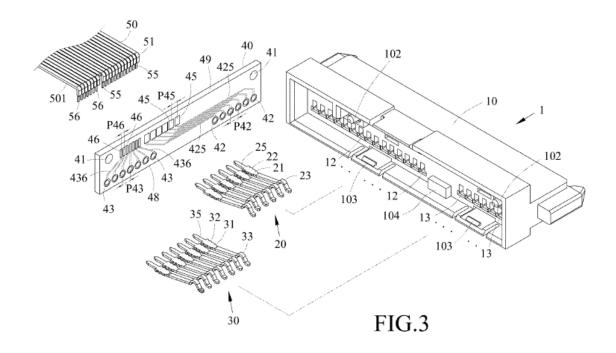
depicts an exploded diagram of the connector components. The connector assembly includes FFC 50, terminals 20, 30, PCB 40, and insulated housing 10. Figure 7, reproduced below, shows a side view of the connector.
